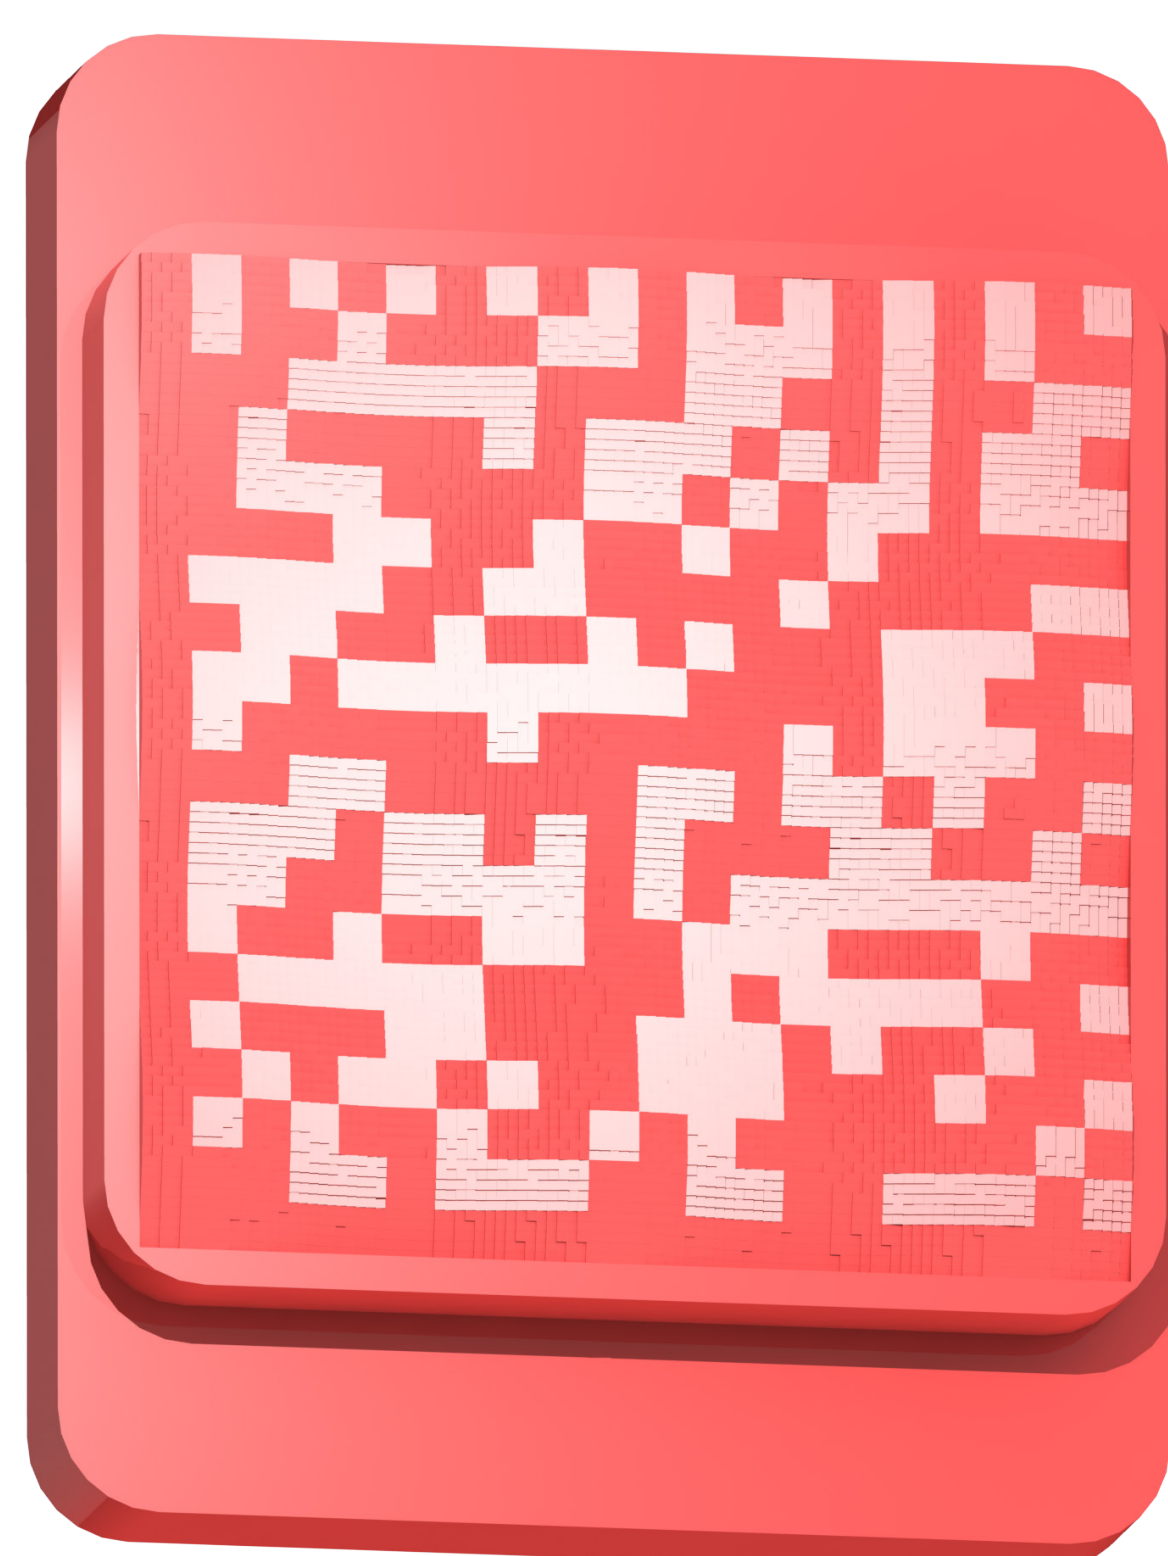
CAD render of final insert with reflectance elements and mounting flanges on top and bottom. Viewed 10° to light source angle.
